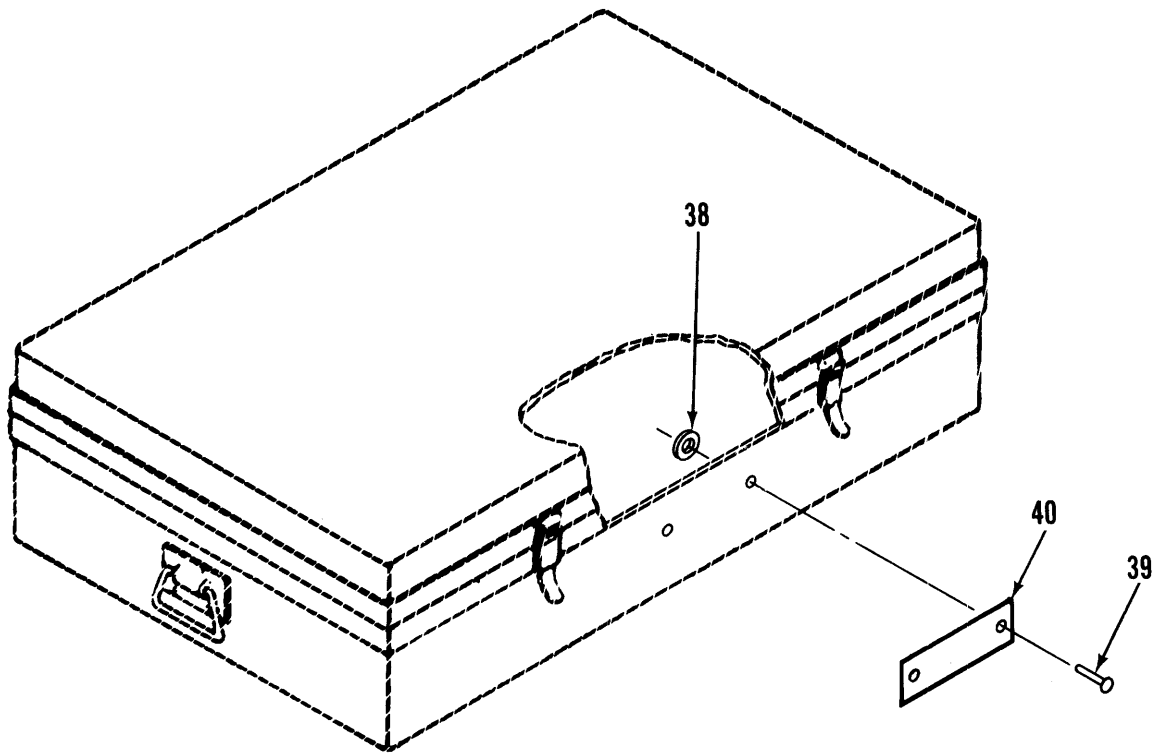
Supply Case Assembly (Sheet 2 of 2)
